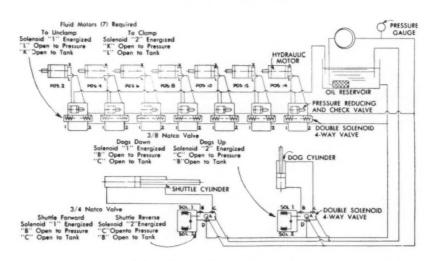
Figure A. Floor plan of machine and hydraulic diagram for traversing and clamping cylinder block
